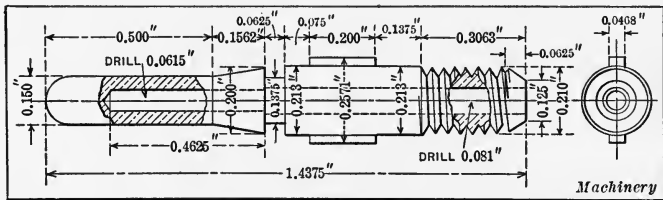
Type of Brass Pneumatic Tire Valve Stem drilled on Machine shown in Fig. 8
